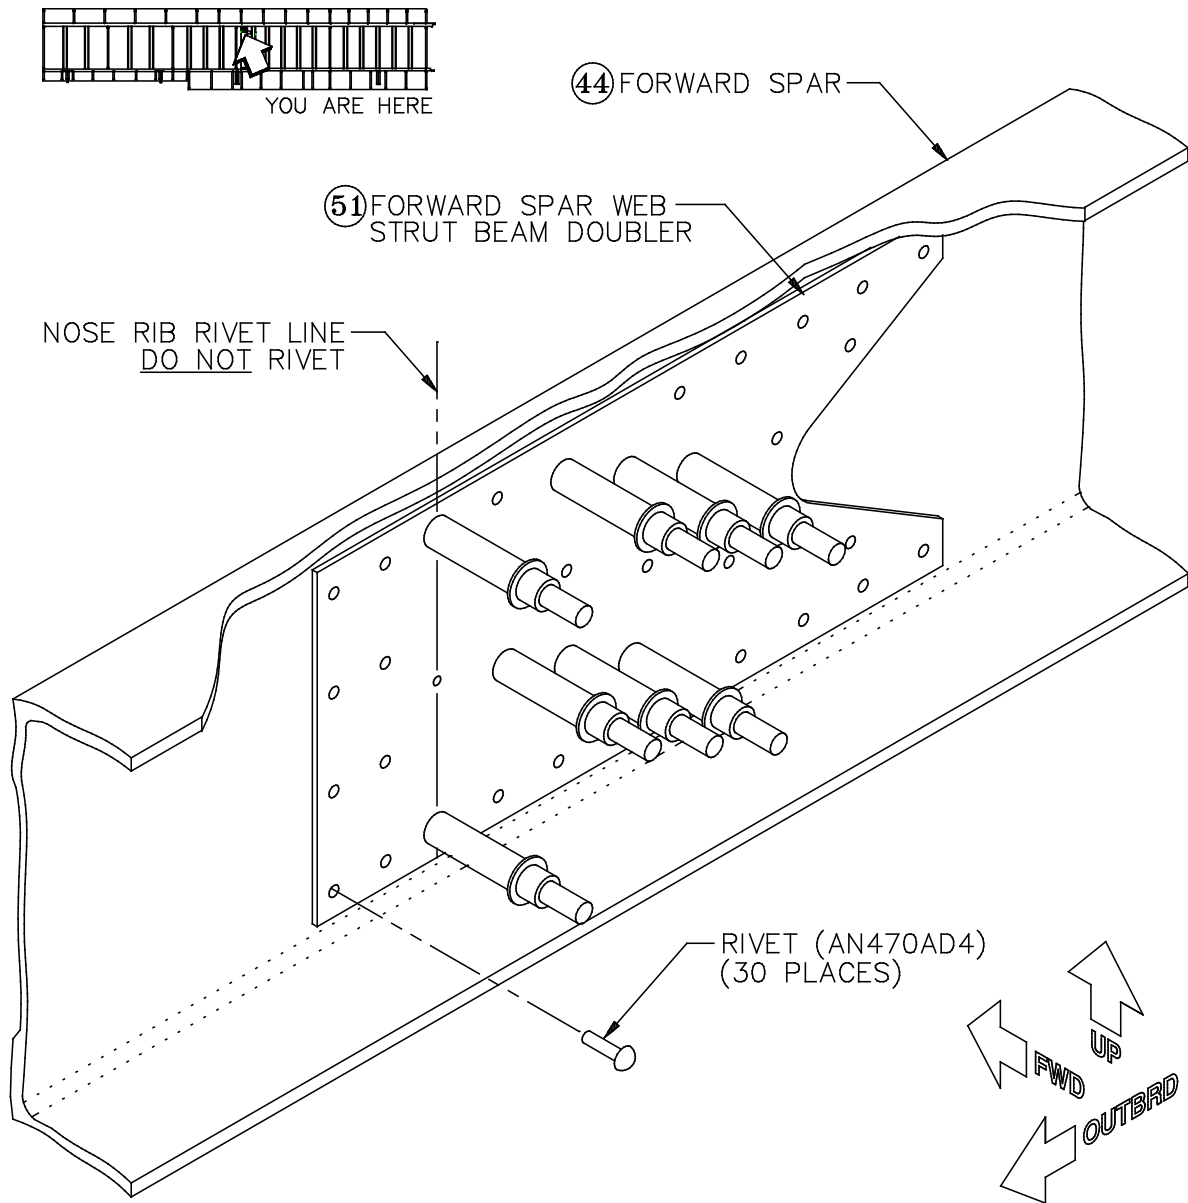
Riveting the Forward Spar Web/Strut Beam Doubler
